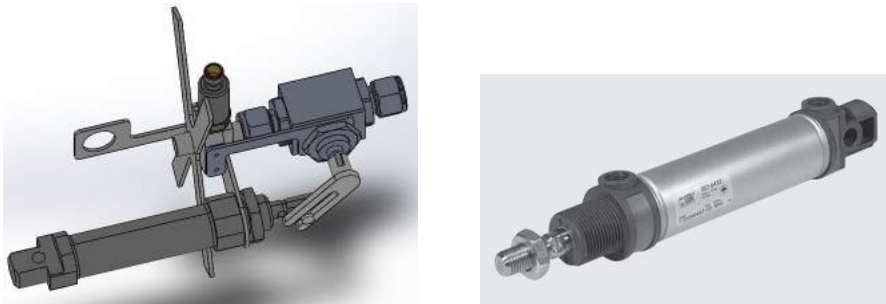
Manual ball valve Ham-Let H6800 connected to cylinder actuator.
